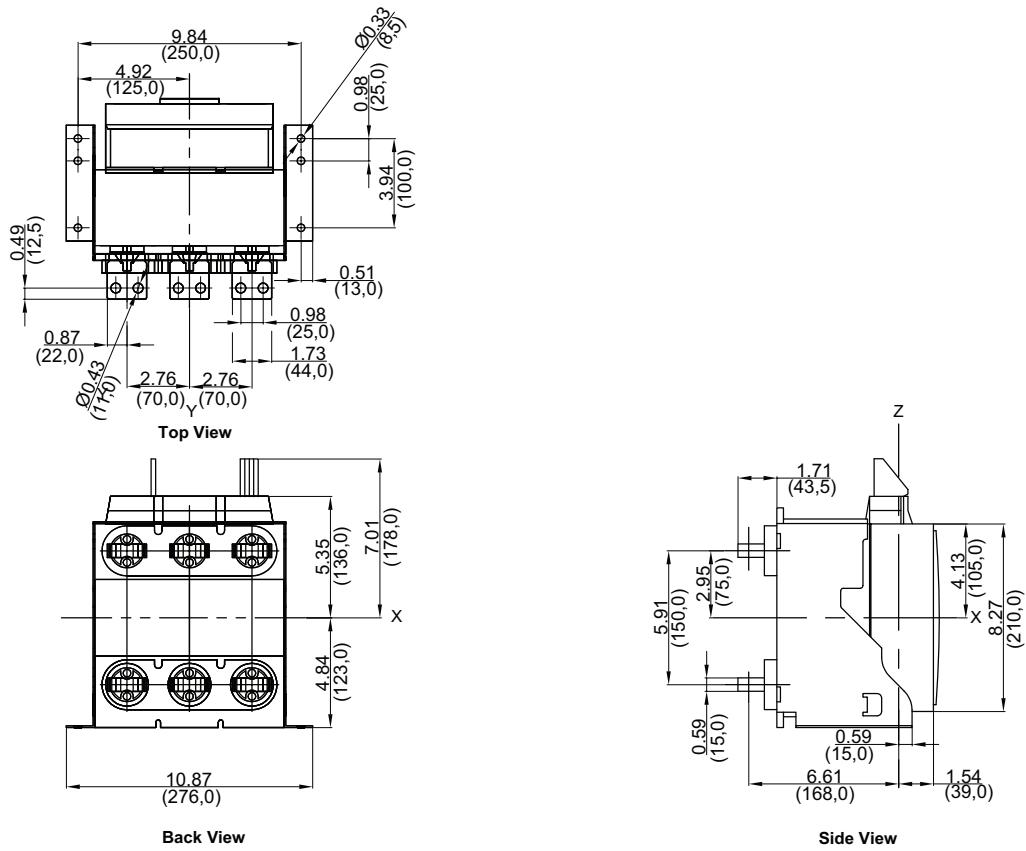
800-1600 A MasterPact NT IEC Three-Pole Fixed—RCTH Rear-Connected “T” HorizontalDimensions: in
